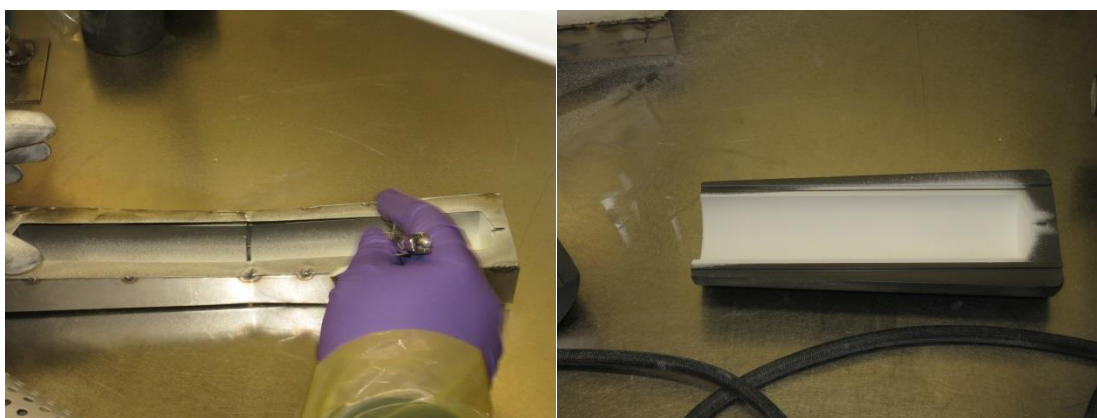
Partially coated heated mold in jig (left). Coated mold piece; note minimal overspray (right).
